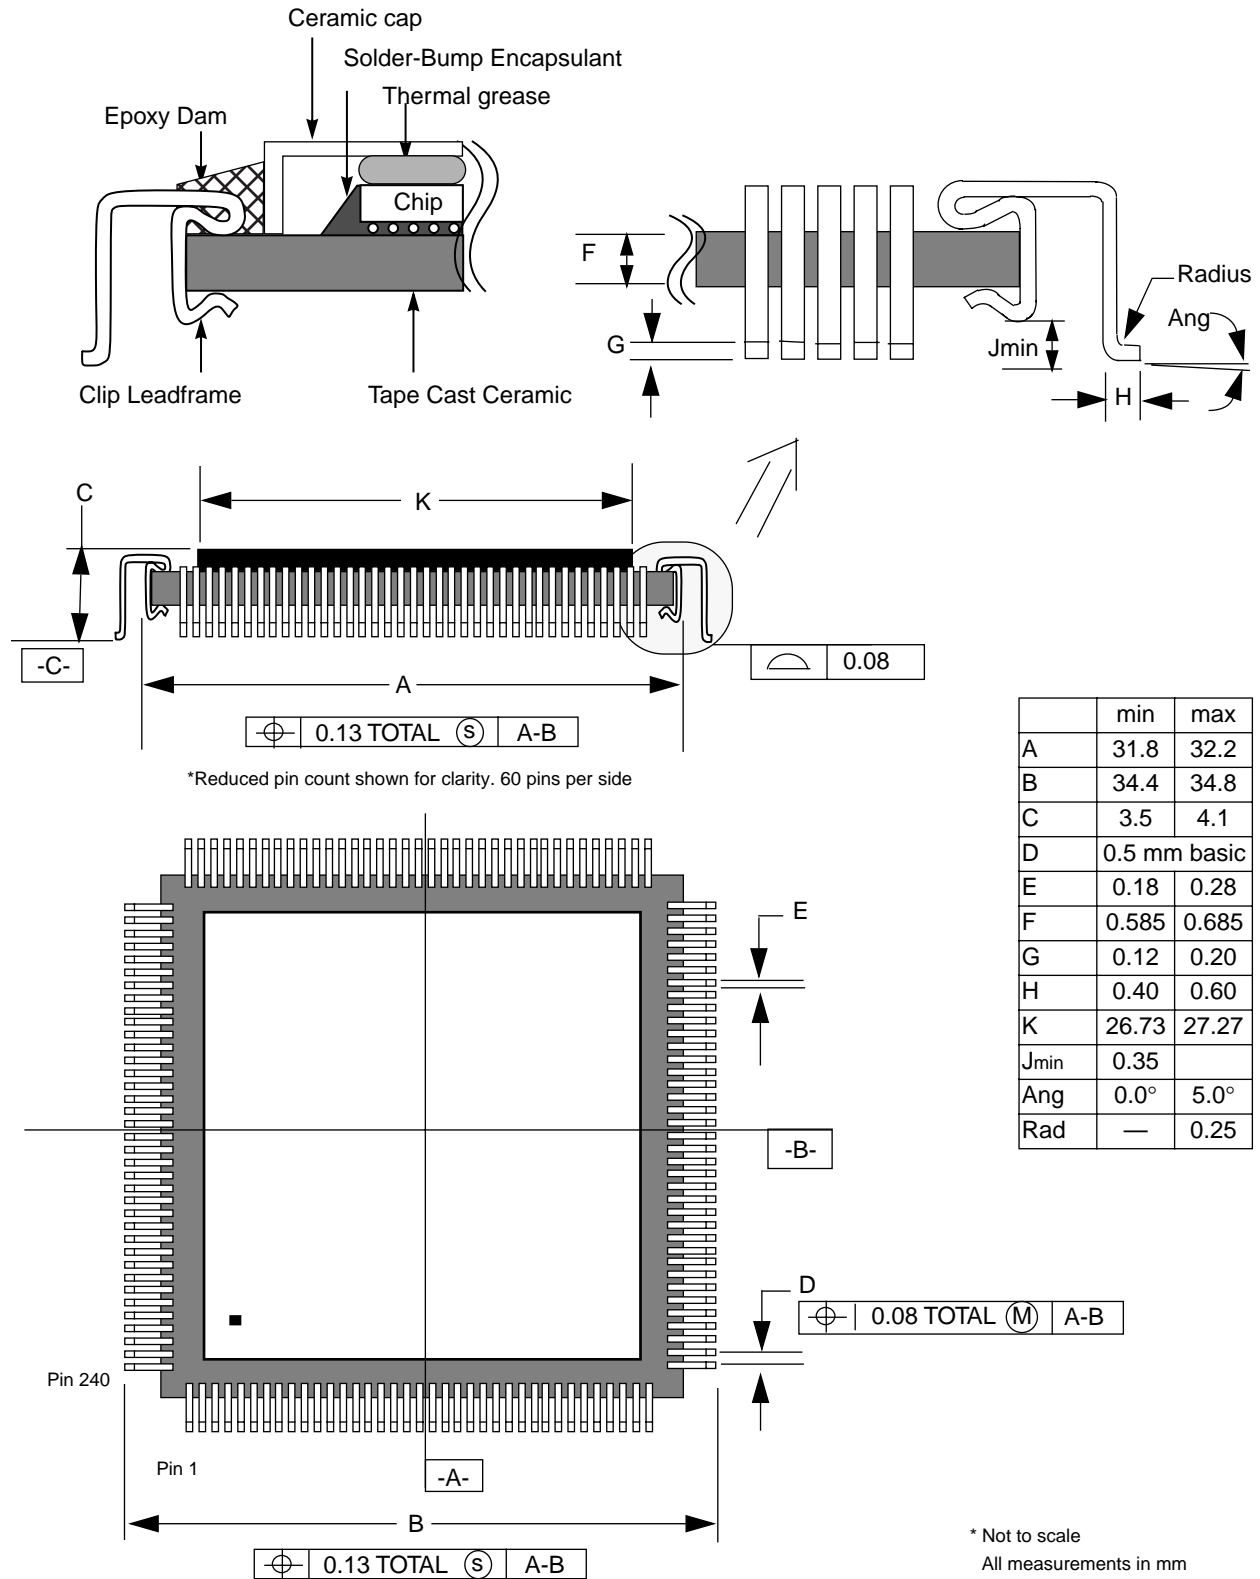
Mechanical Dimensions of the IBM Solder-Bump CQFP Package
